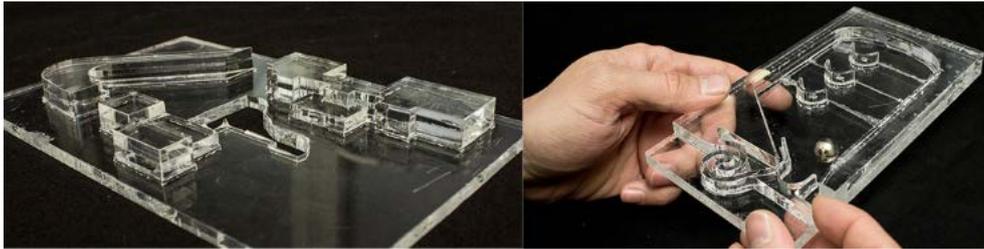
LaserStacker: Fabricating 3D Objects by Laser Cutting and Welding*. (Source: “*LaserStacker: Fabricating 3D Objects by Laser Cutting and Welding*” [13], 2015)
